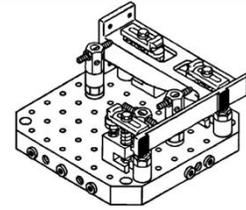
Fixture used for Hub Boring, Spot Facing, Pin Side Facing, Turning, Recess, Circlip Groove, Transition at Shoulder.
